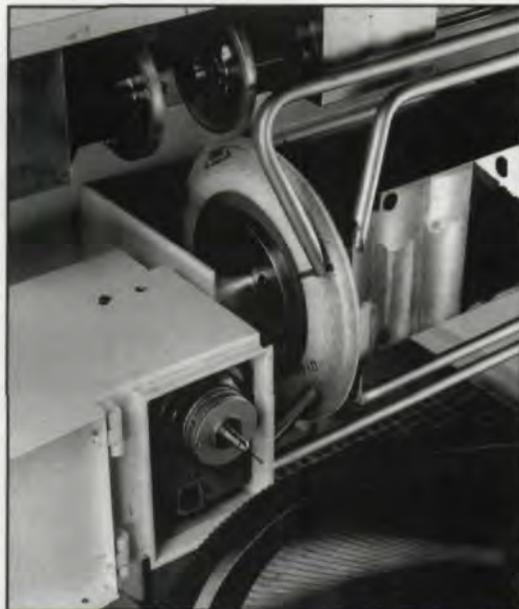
Integrated measuring probe on a Pfauter 1200 mm profile grinding machine grinding head. The probe is used to establish the angular position of the gear relative to the stock envelope condition on the workpiece and to inspect the finish ground gear.
